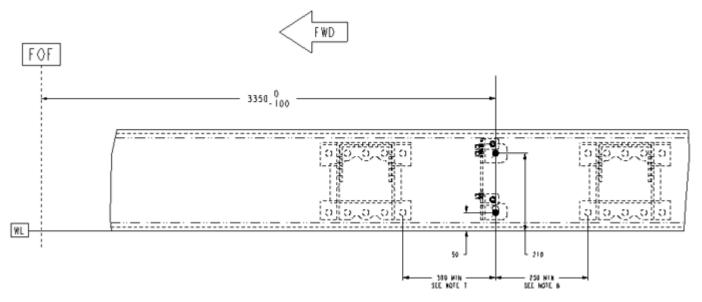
Optional Module Drilling Location for Bracket Installation
